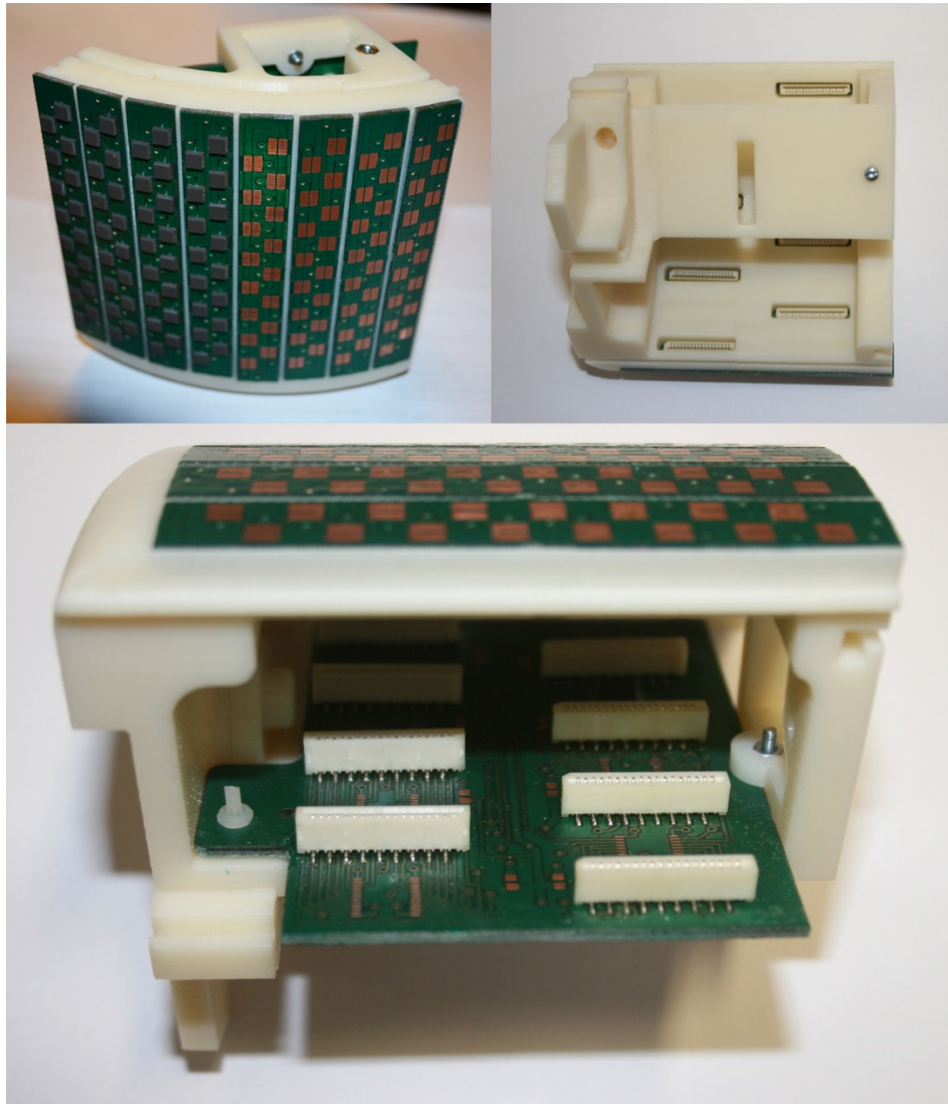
Assembled 3D printed Wheel Segment. Each Wheel Segment was manufactured using 3D printing to keep the accuracy and intricacy of the CAD model.
